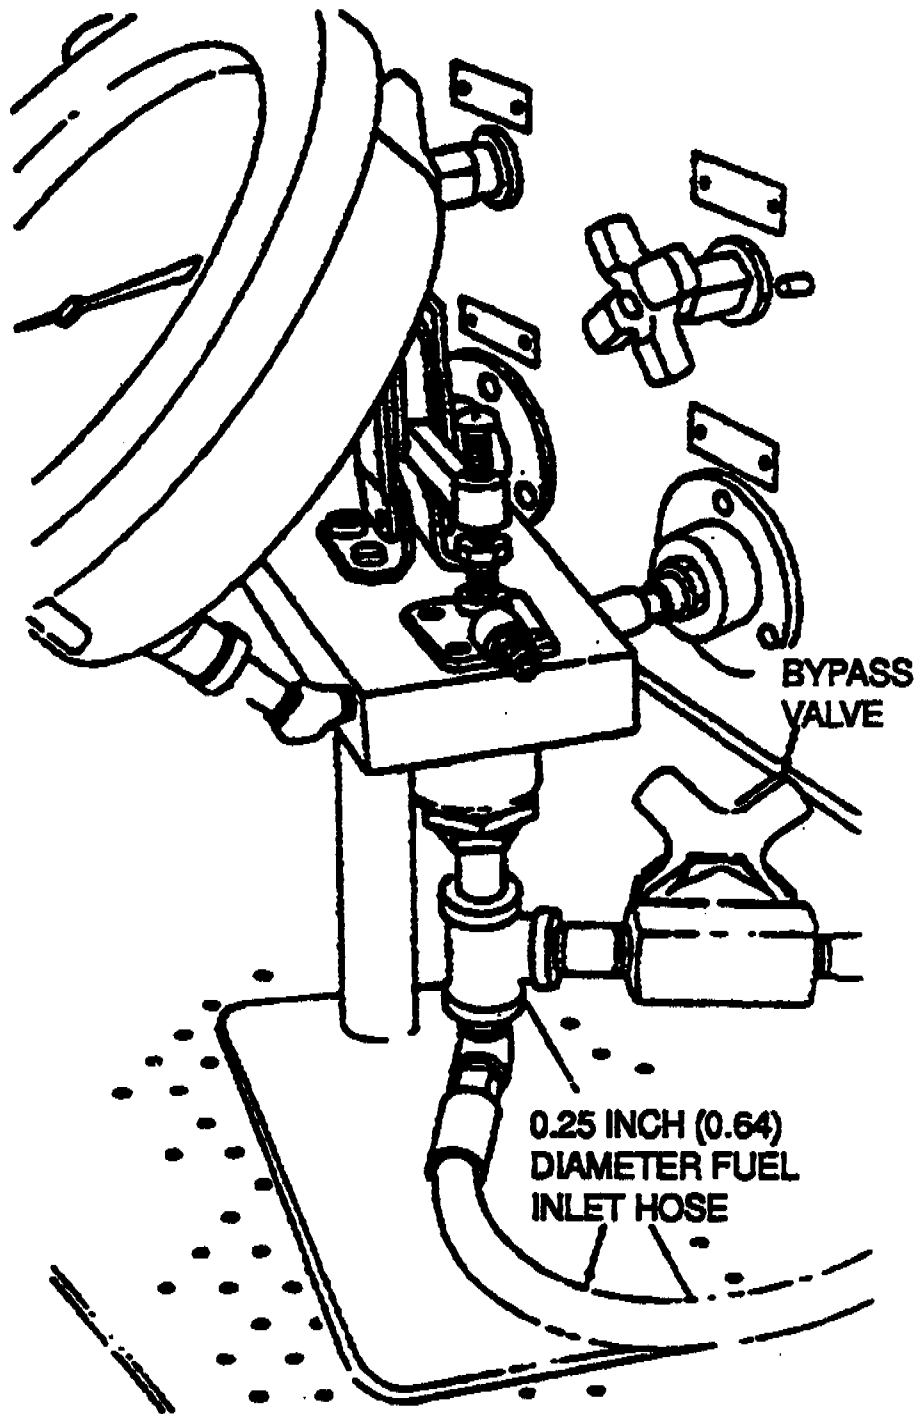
Combustion Chamber Drain Valve Assembly Test Setup.
